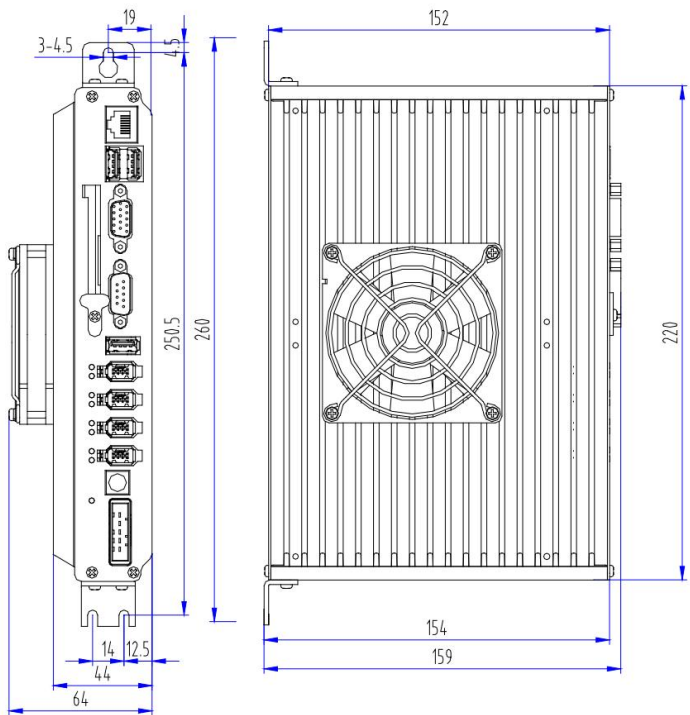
Dimensional drawing of HPC-100 IPC unit – vertical
